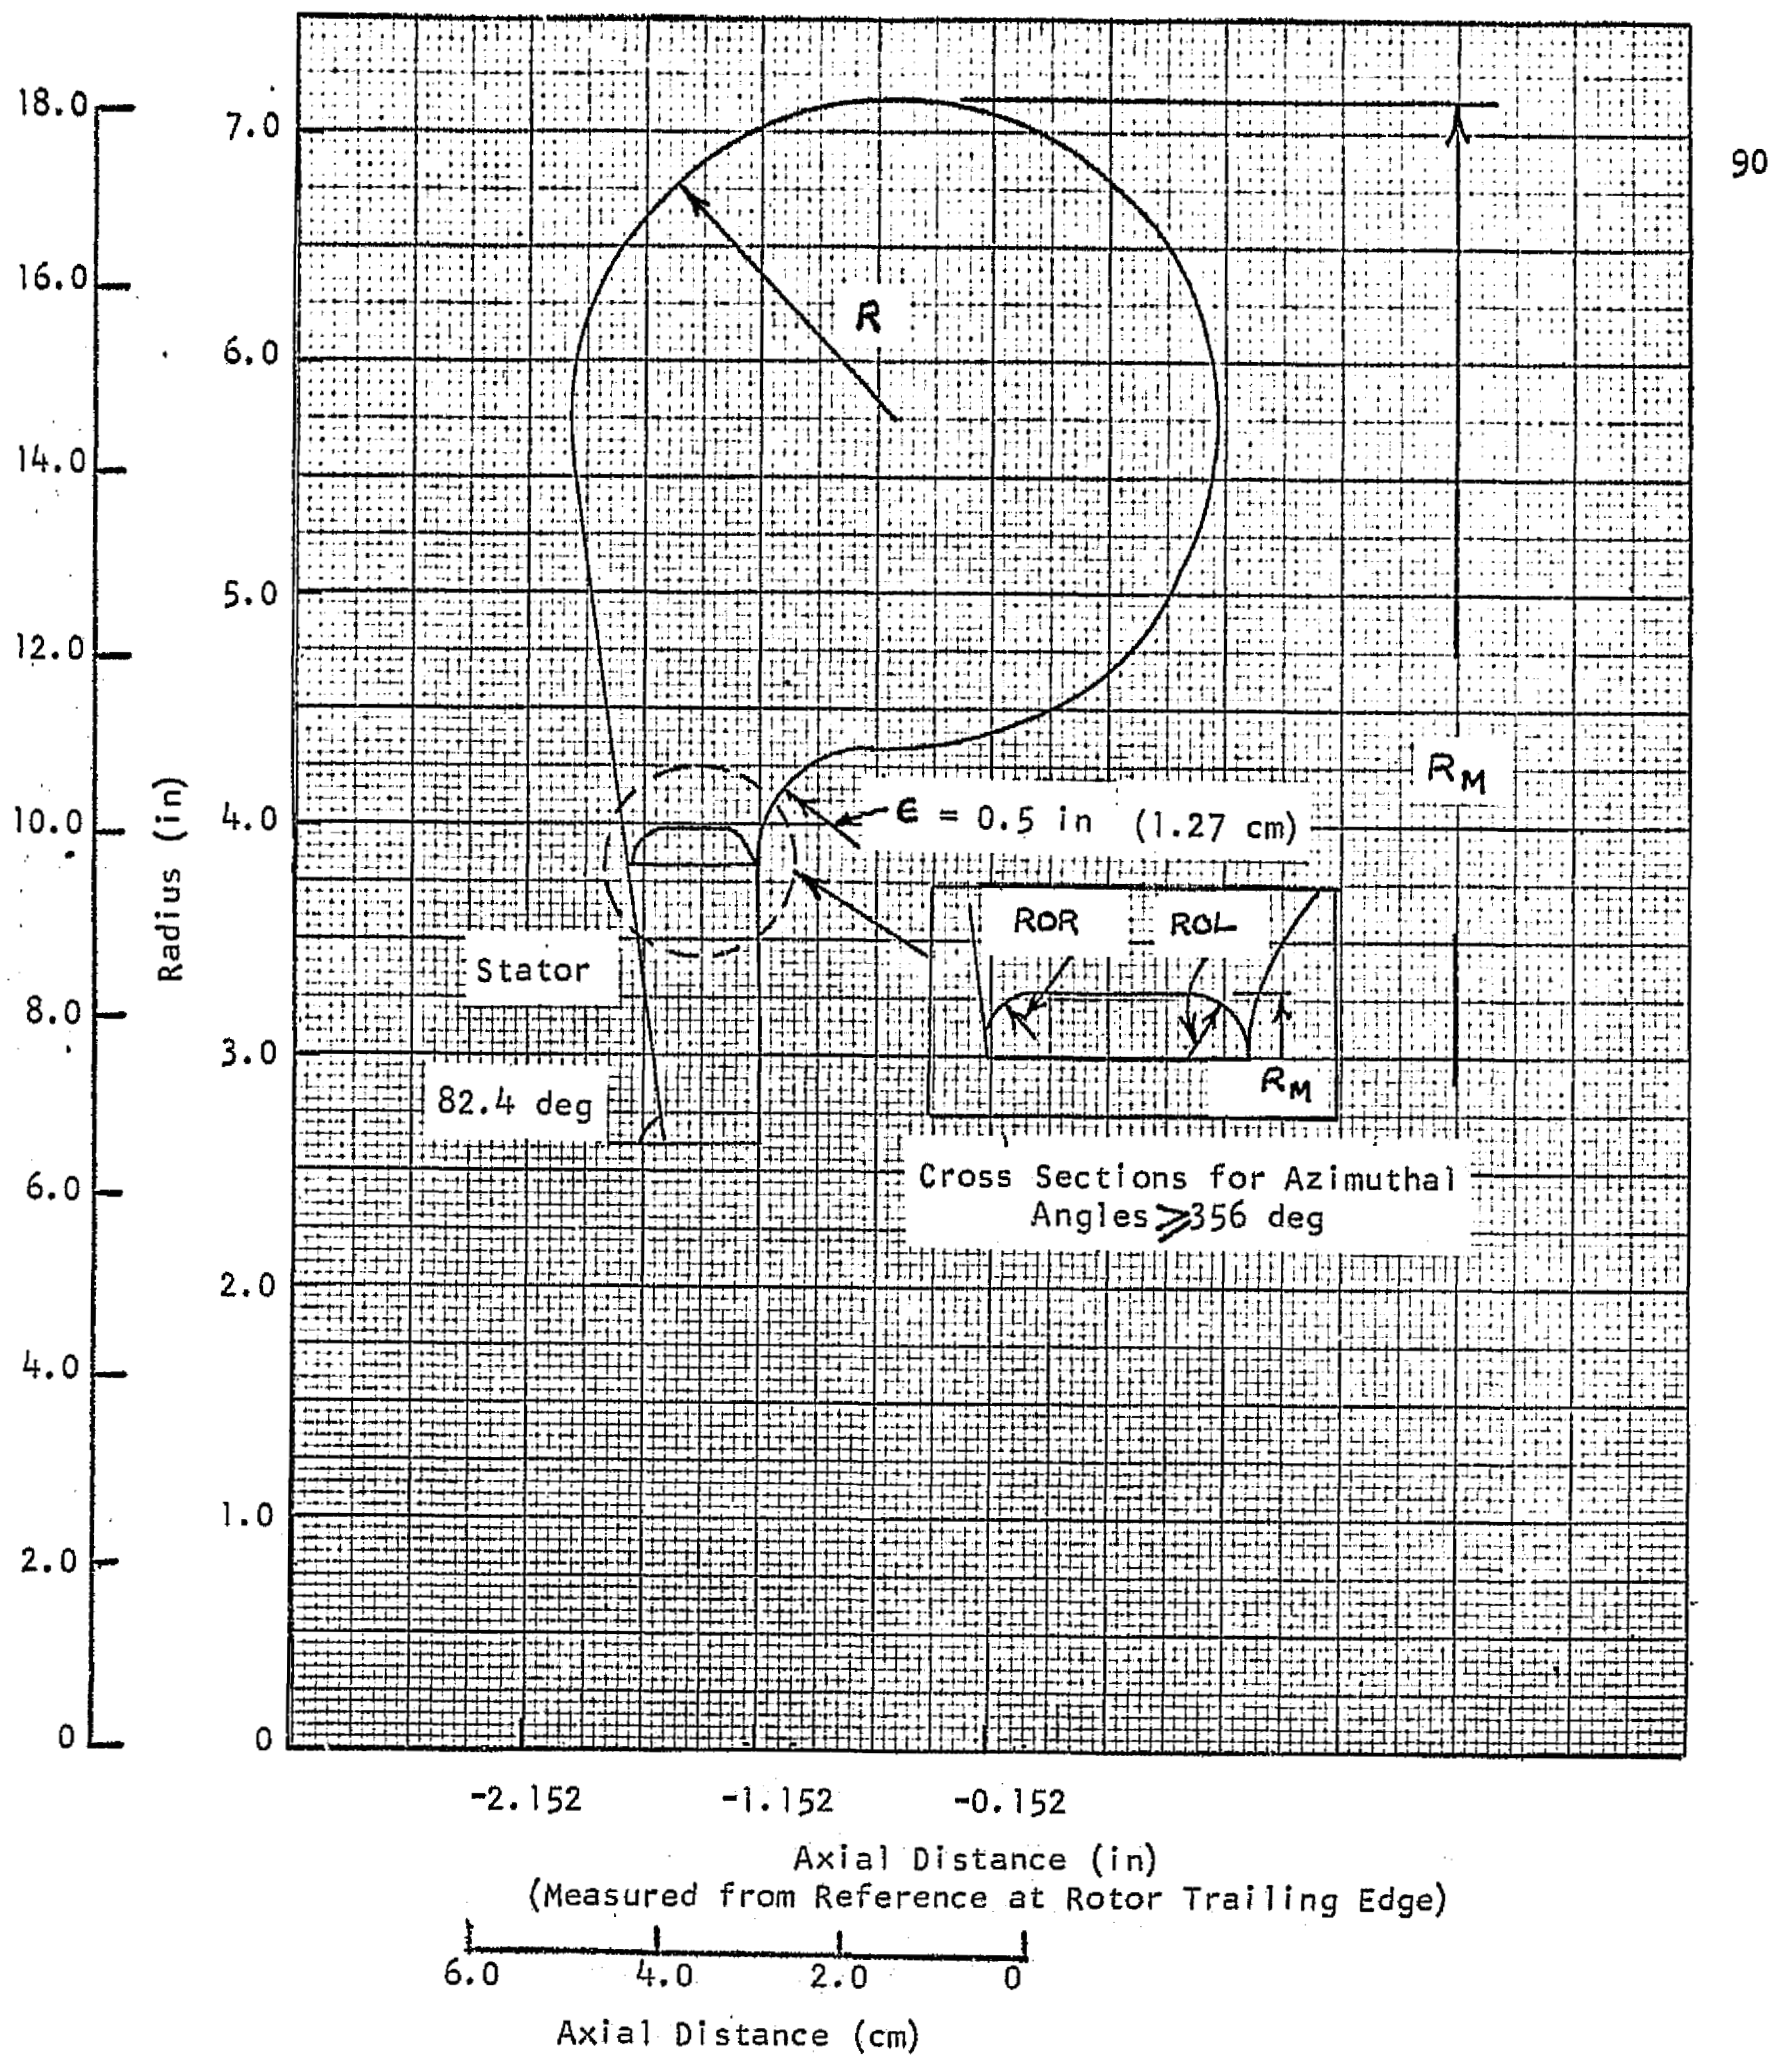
TURBINE INLET SCROLL GEOMETRY
